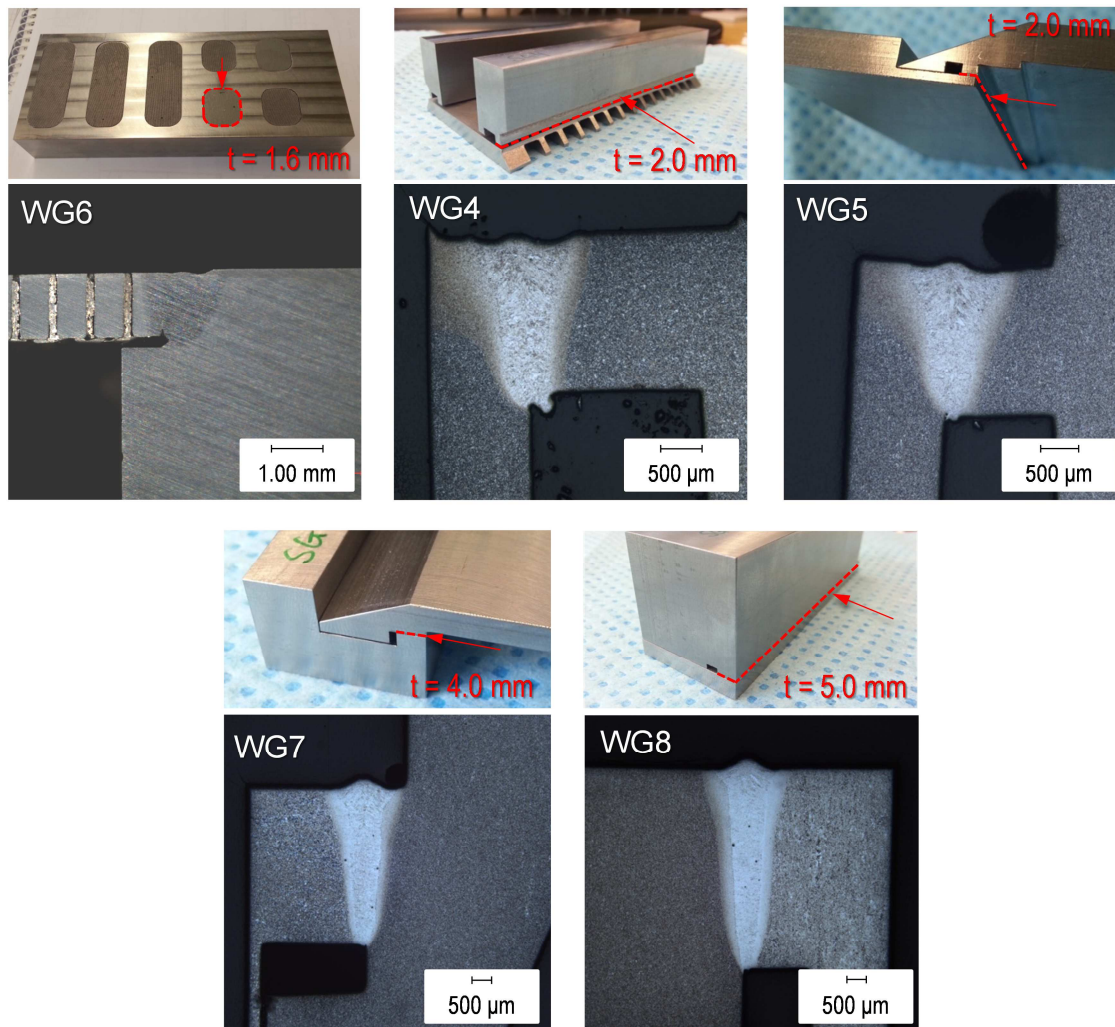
Welding experiments performed to 5 characteristic welding situations in SHOBUs, corresponding to the welding groups WG6, WG4, WG5, WG7, WG8. The t in each of the 5 pictures indicate the welding thickness. The qualification of the welds have been performed by Krasnorutsky et al. (2014) according to the DIN EN ISO 13919-1 norm. All the welds have reached a class “B” in the aforementioned standard, which corresponds to the highest rating, as required in the defined quality standards for SHOBUs. The resulting welding parameters have been applied to the SHOBUs mock-up.
